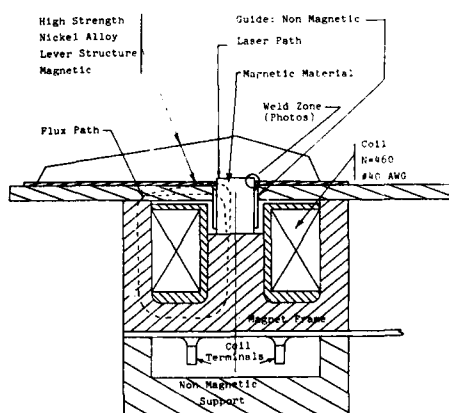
Cross section of magnetic retention weld setup.
